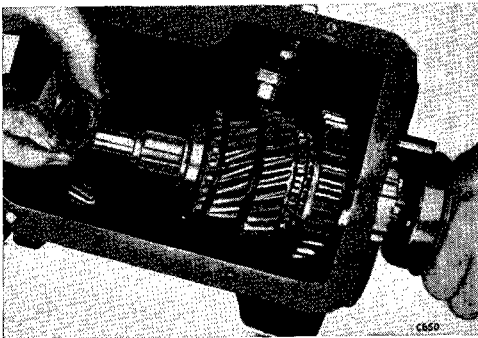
Assembling the thrust washer with its scrolled face towards the gears
